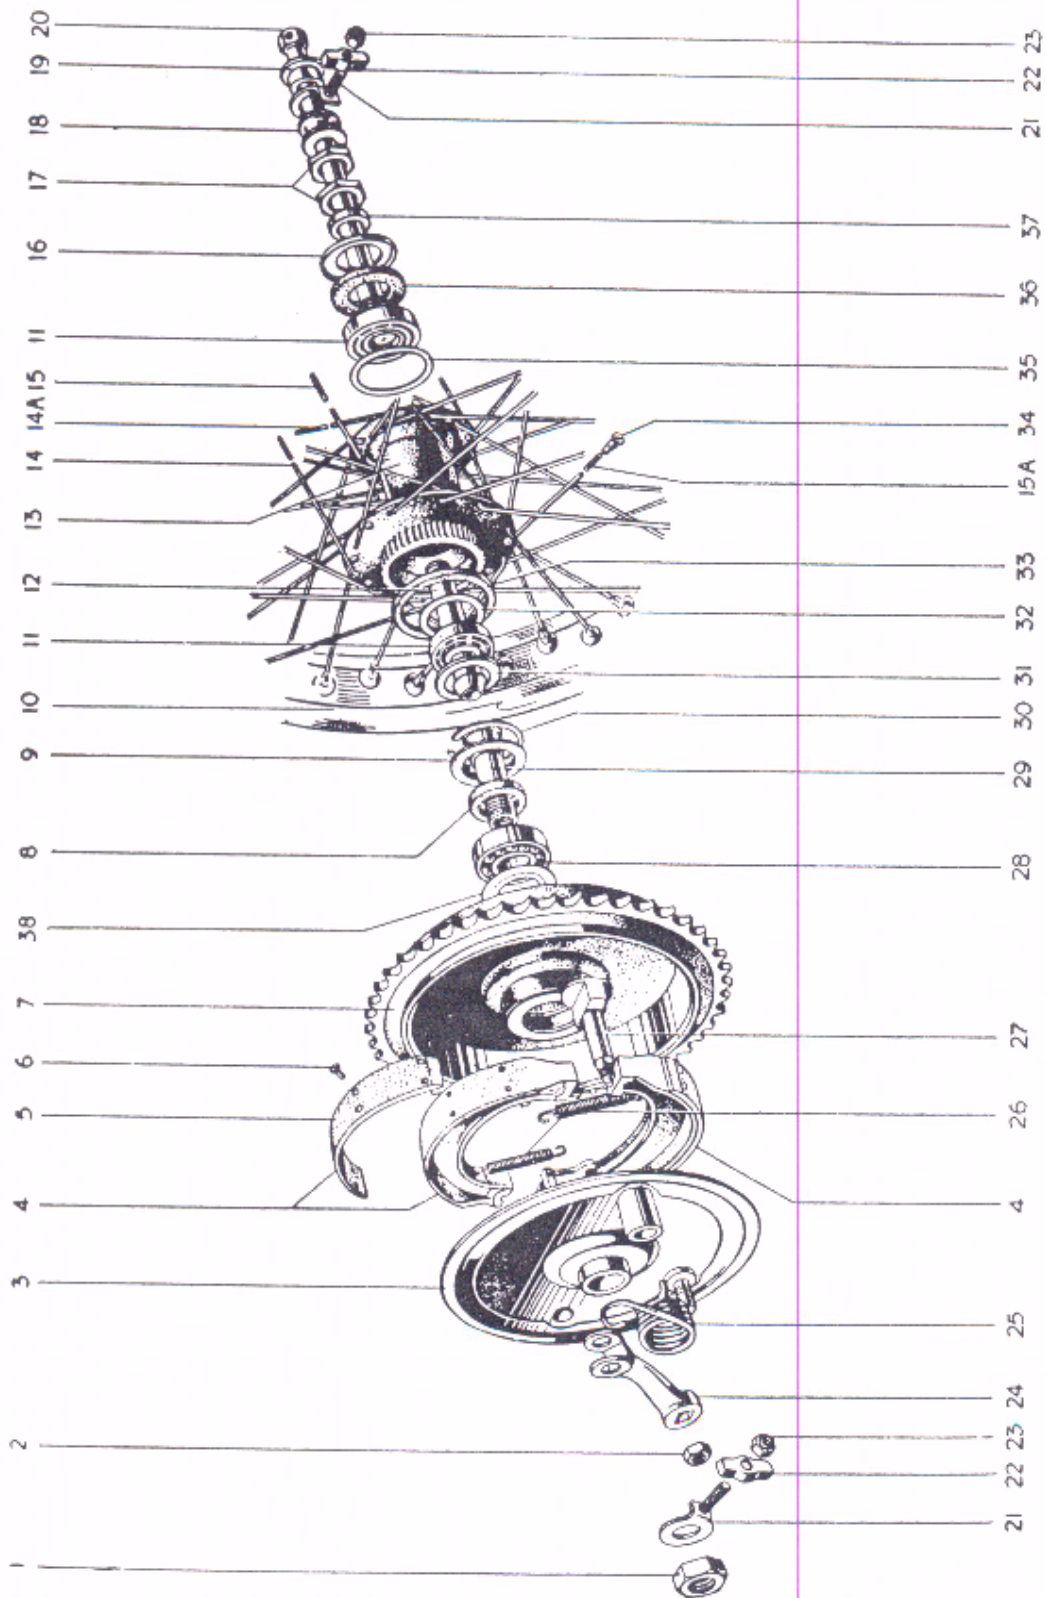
QUICKLY DETACHABLE REAR WHEEL.
